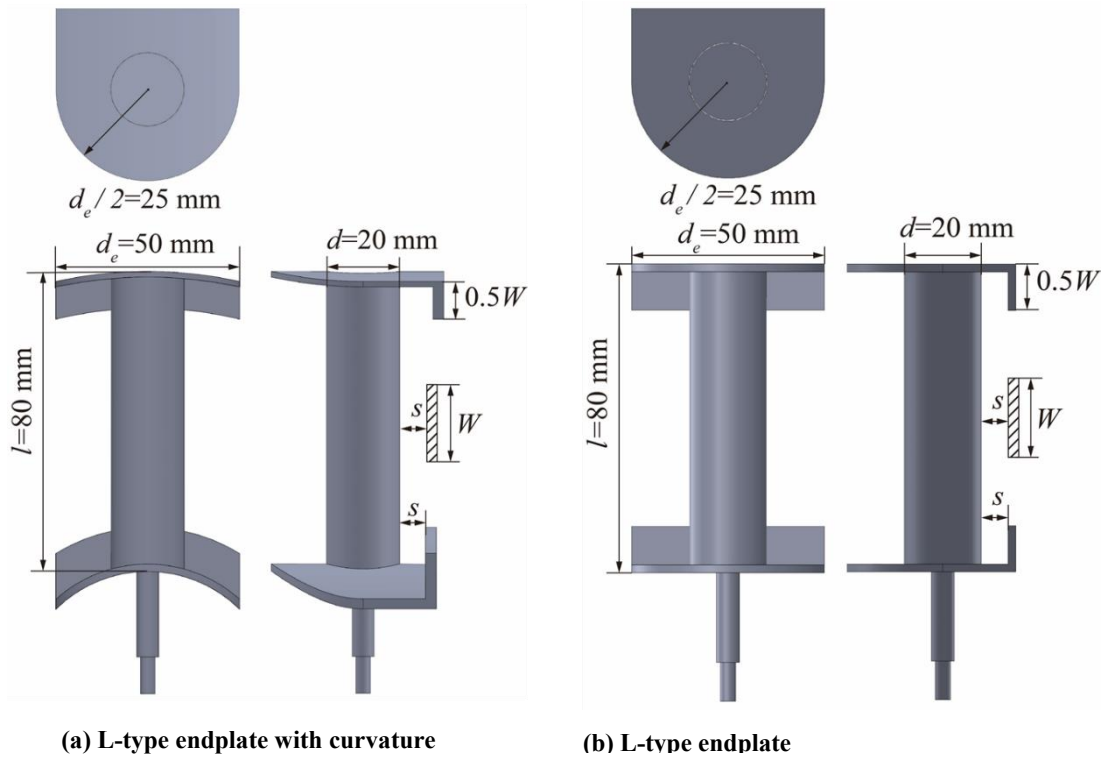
Detailed view of the L-type endplates attached to both ends of the circular cylinder blade.
